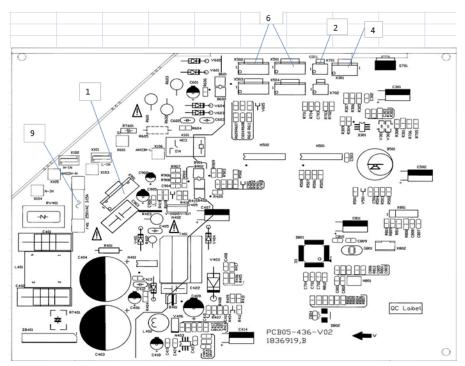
(9-18k units) 1833235 Indoor Unit Printed Circuit Board Identification
